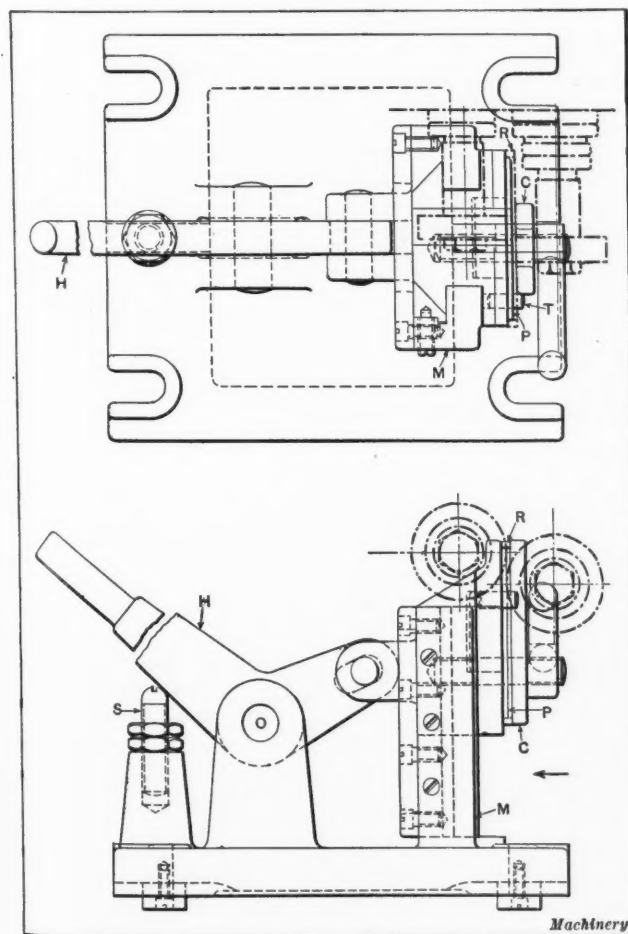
Plan and Front View of Fixture for holding the Rings during the Splitting Operation, showing Means for locating the Work and Relative Position of Cutters
